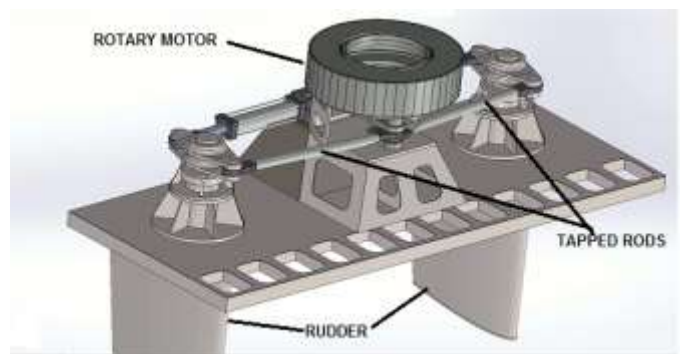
3D Solid model of rotary electromagnetic drive in servo-assistance to the hydraulic steering gear.
